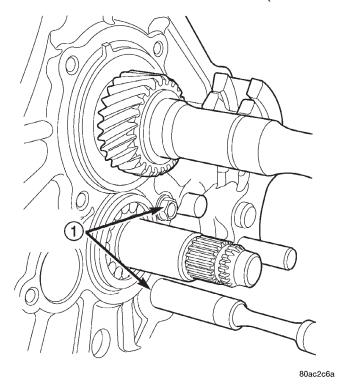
Remove Reverse Shift Arm Bracket Bolts
